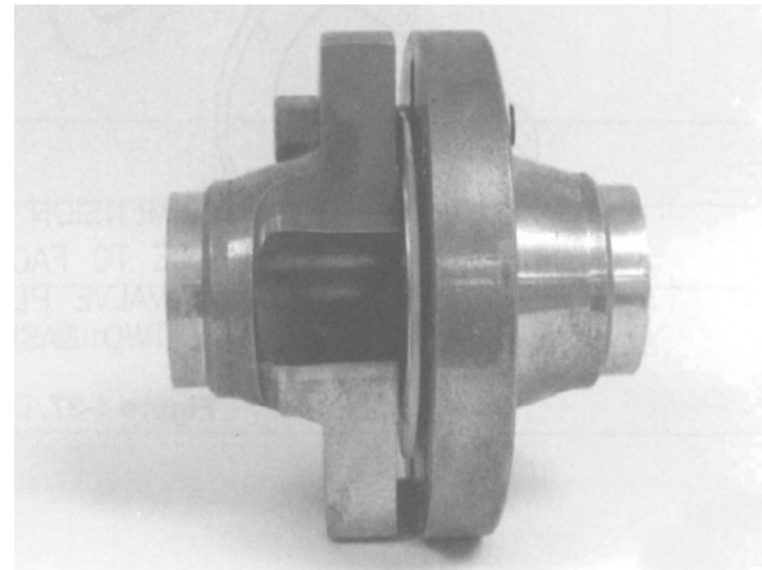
Flat ring gasket between flanges. *Courtesy of Flexitallic, Inc.
